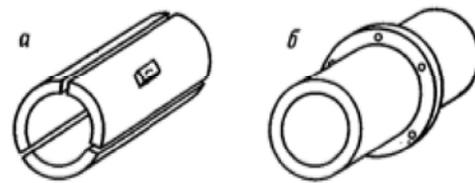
The radial gas bearings. a) Segmental. b) full-scope.
